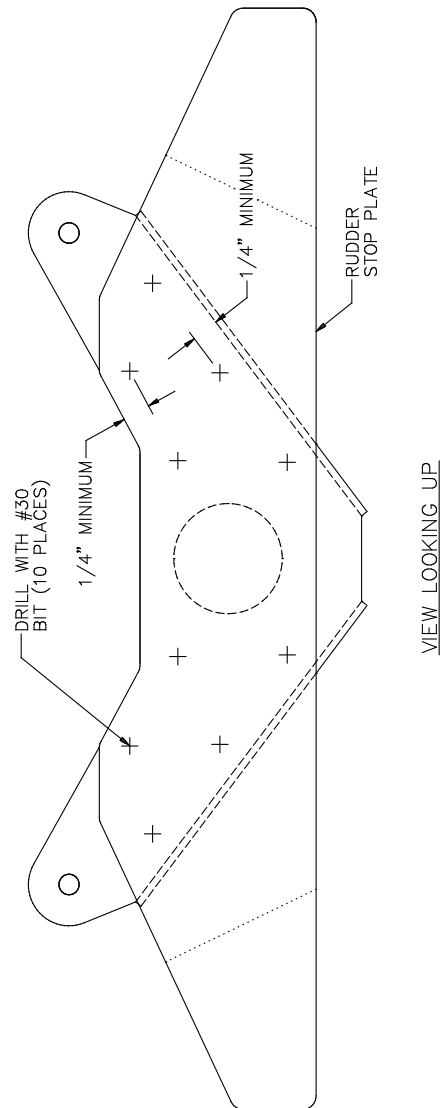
Drilling the Rudder Stop Plate Rivet Holes
